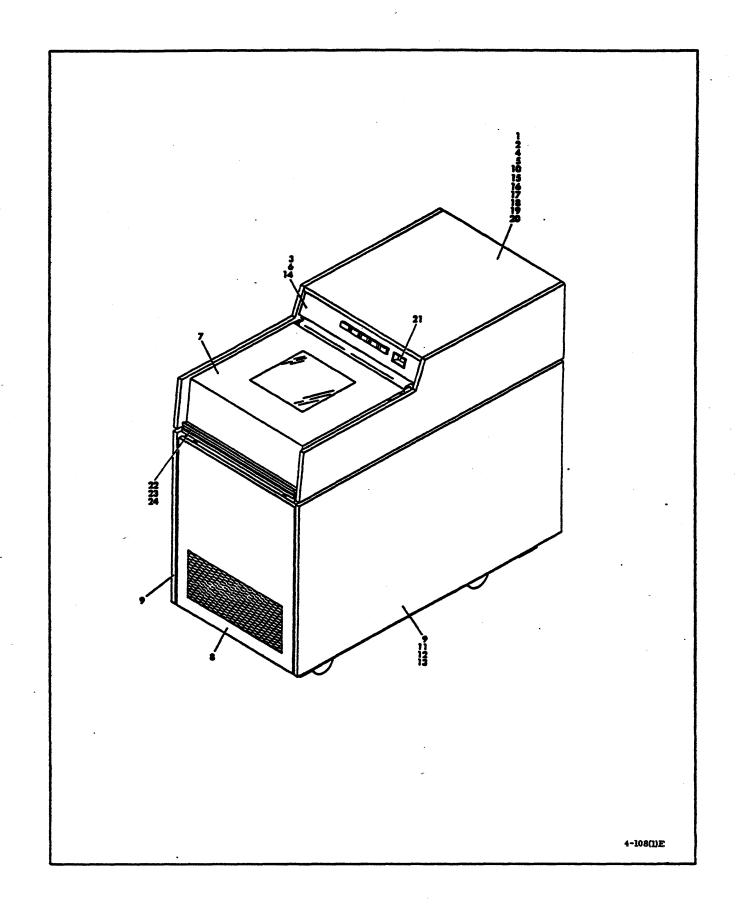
FINAL ASSEMBLY (SHEET 1 OF 3)
